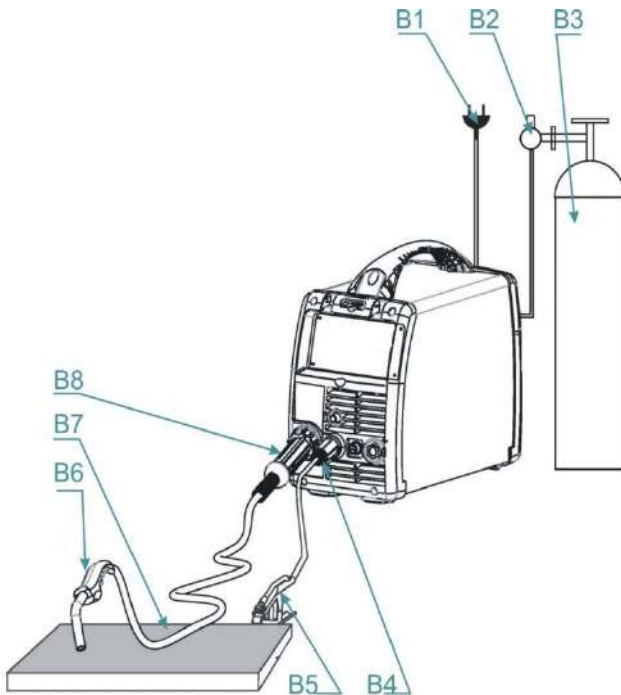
Connecting the MIG / MAG welding torch and ground cable.
